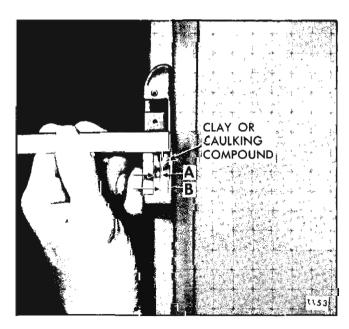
F27—Tail Gate Lock Striker Caulking Check
